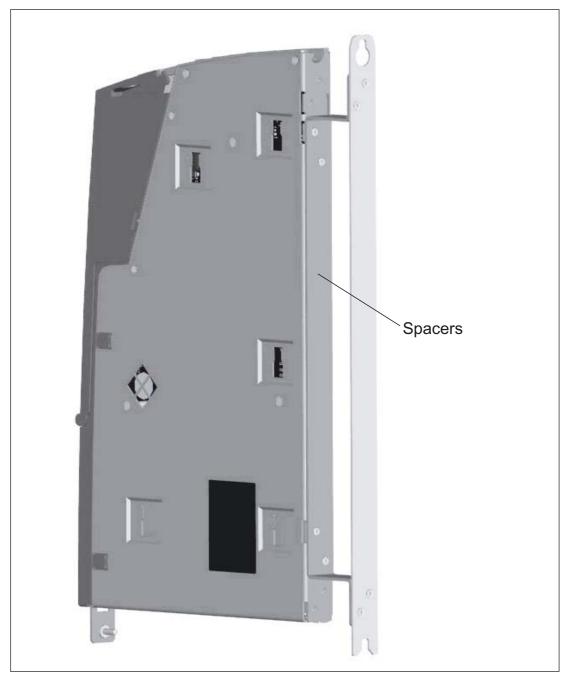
Mounting the CX32 on a mounting surface using spacer elements
